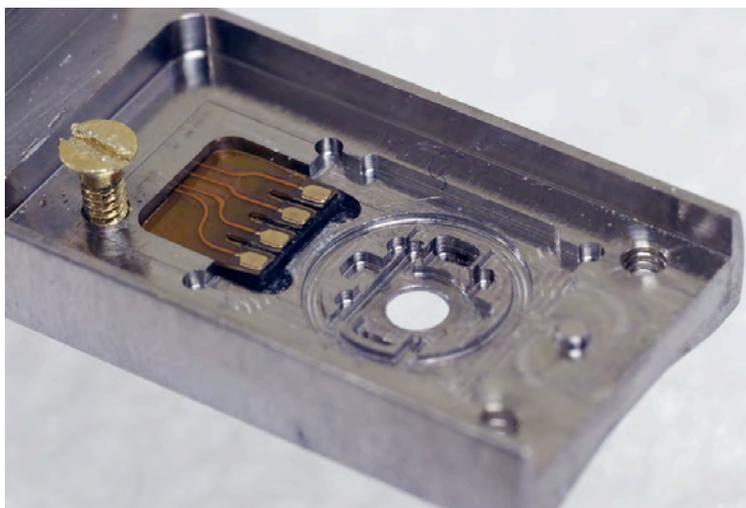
ATMOSPHERE HOLDER TIP (JEOL UHR DESIGN) SHOWING O-RING POCKETS, FLEXIBLE CIRCUIT, GAS PORTS AND SCREWS
